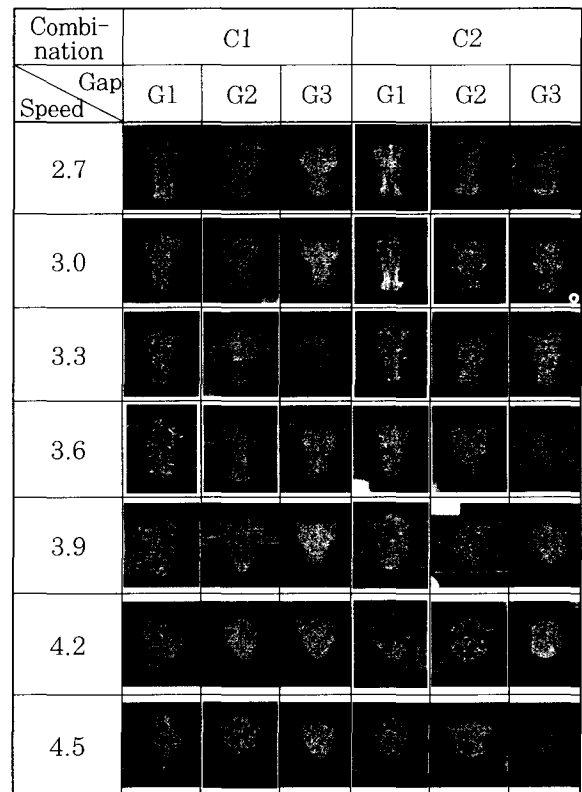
Sectional geometry due to thickness combination, welding speed and gap
